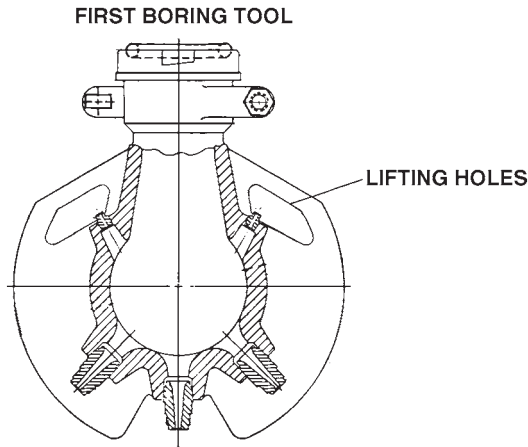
Boring tool for hydraulic decoking.
